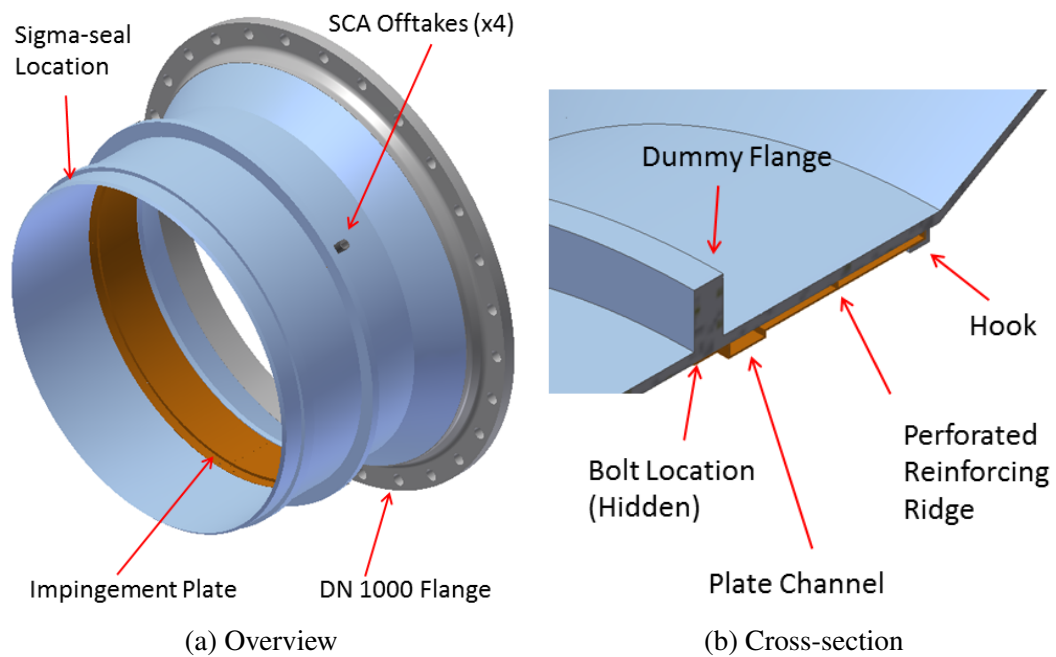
Test casing replica of real casing design. The light blue matches basic real engine geometry. The orange section is impingement plate. The grey flange is for assembly purposes rather than experiment necessity.
